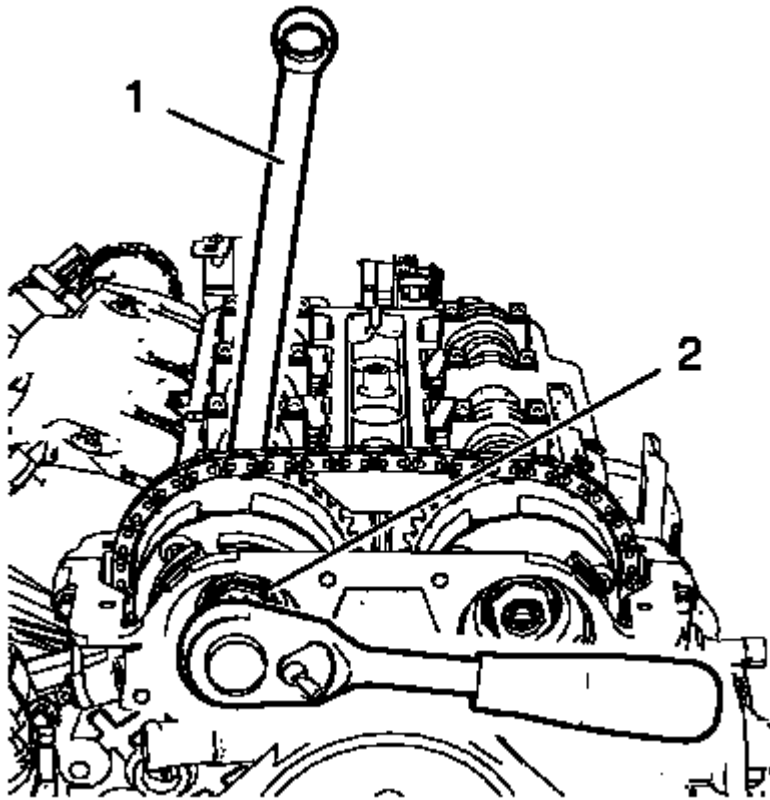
Intake Camshaft Sprocket Bolt And Hexagonal Wrench
